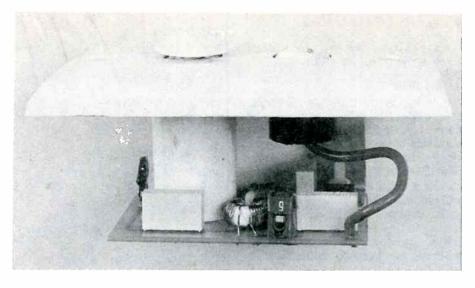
By using parts from an old light dimmer, the PCB can be fitted to a standard size wall plate for use with an exhaust fan.
